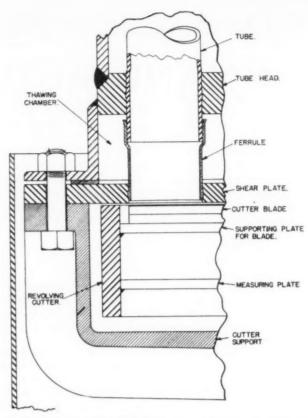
SECTION THROUGH LOWER PART OF MACHINE, SHOWING SHEAR PLATE, AUXILIARY THAWING CHAMBER, REVOLVING CUTTER
